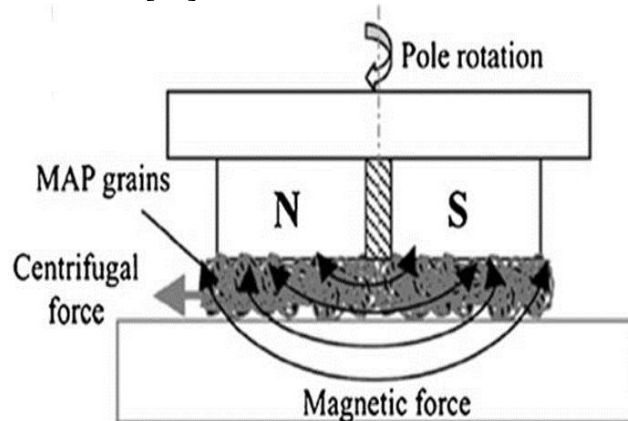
Mechanics of material removal in MAF on flat surfaces [15]
